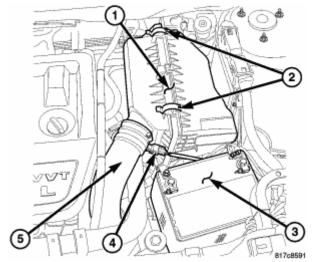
Air Cleaner Housing Courtesy of CHRYSLER LLC
